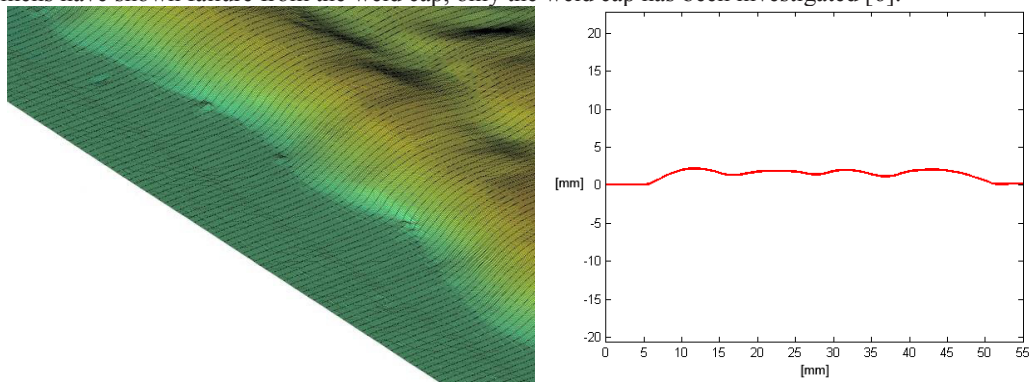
3D view in a $0.05 \times 0.5 \text{ mm}^2$ grid of a weld toe and adjacent base material in the as-welded conditions (left) and a cross section of the weld (right)
